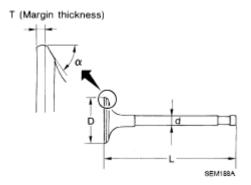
Checking Dimensions Of Valve Courtesy of NISSAN MOTOR CO., U.S.A.
